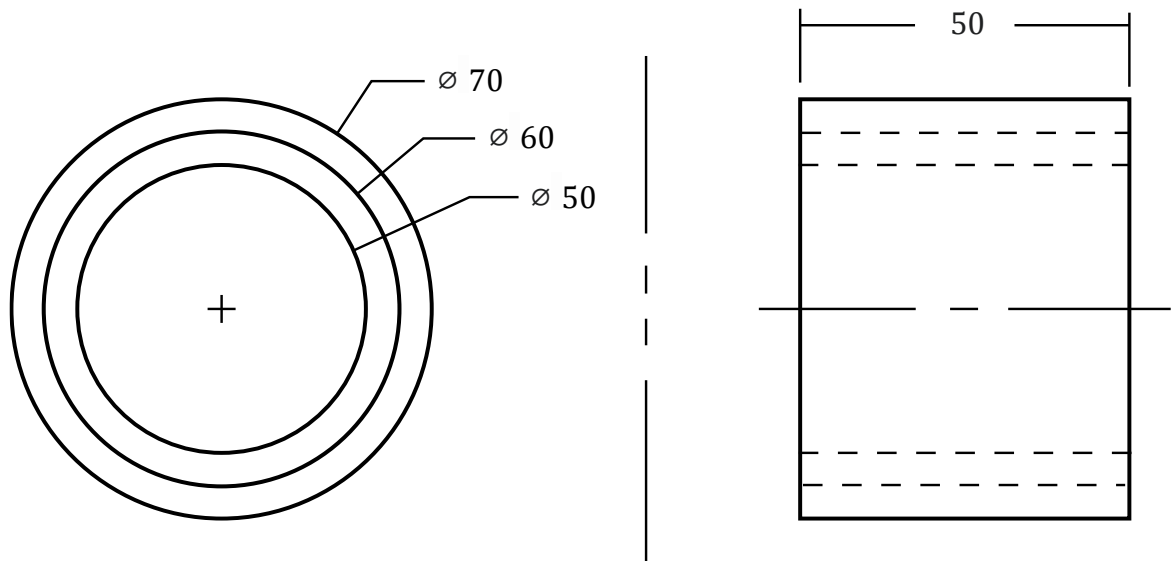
Dimensions of shaft and touchdown bearing (mm).
